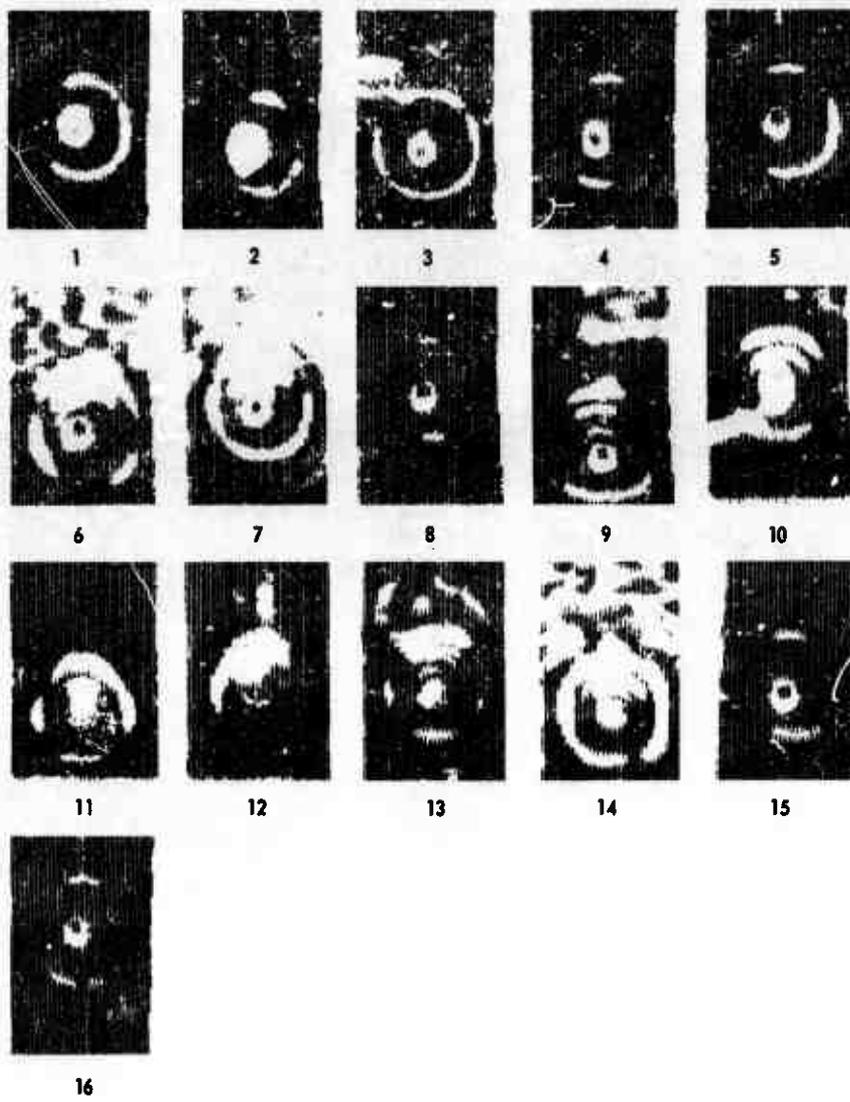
C-Scan Record of Series 9 Welds.
